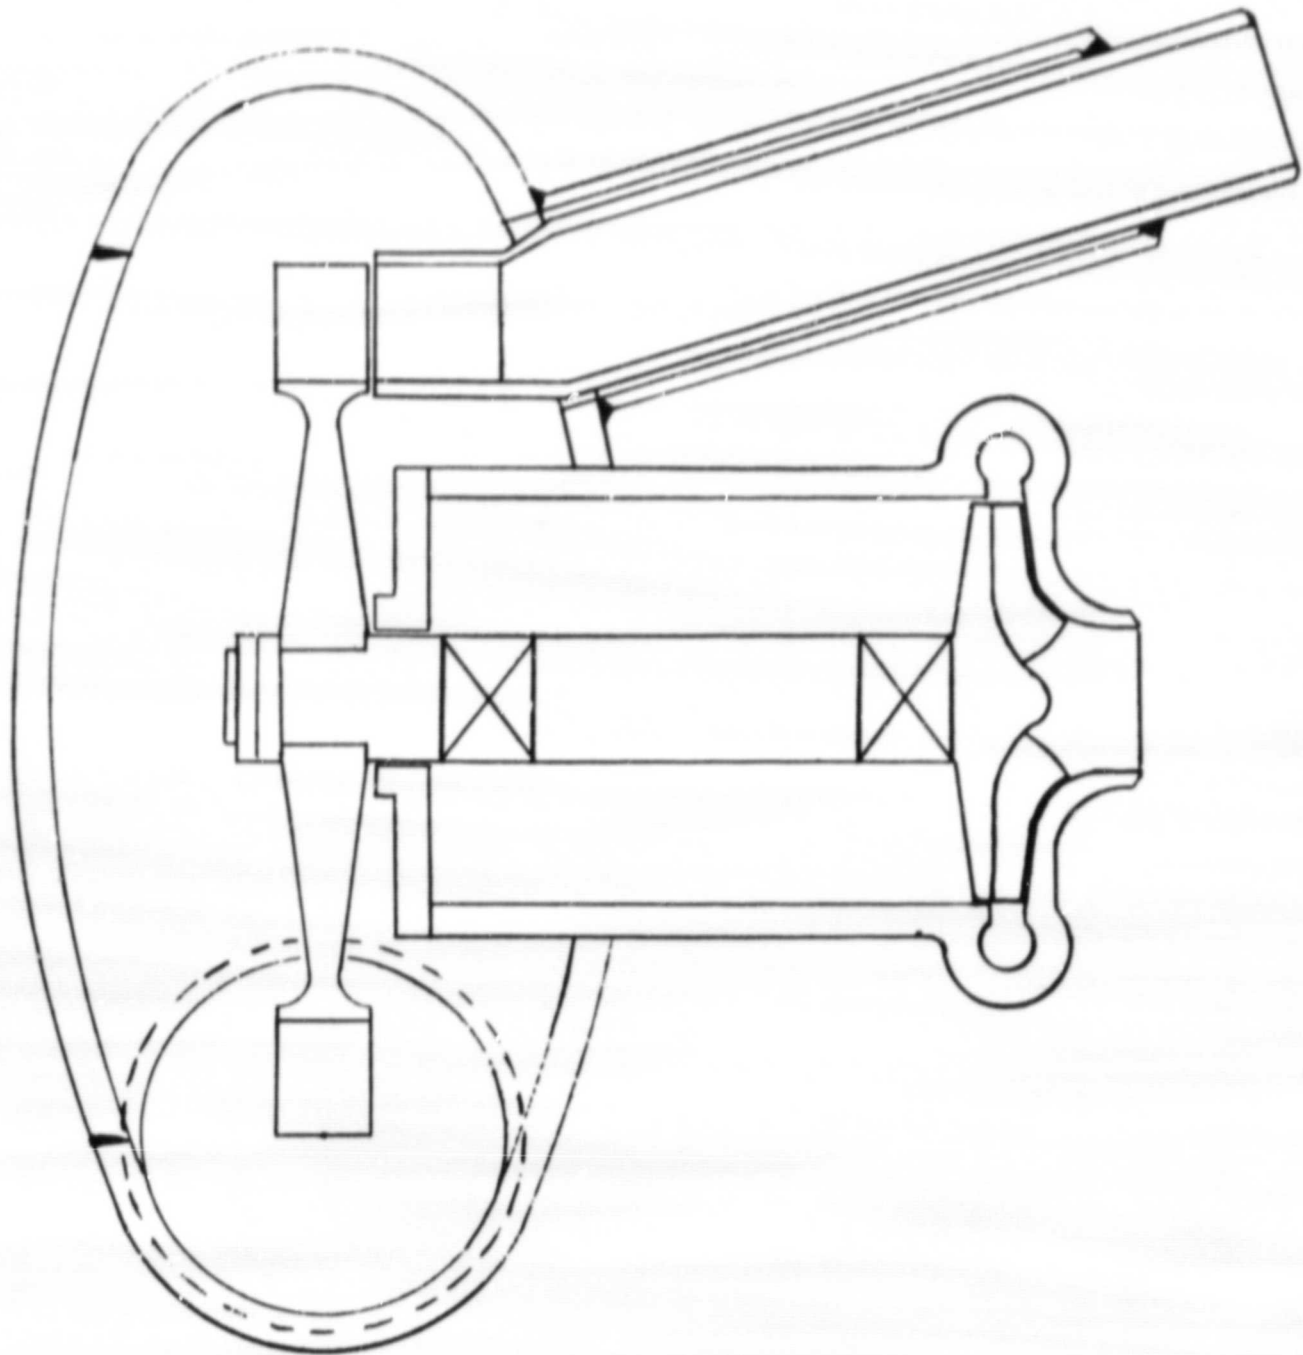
Cross Section of the Preliminary Design of the Free Turbine-Driven Pump for Cesium Boiler Feed Application. Shaft speed, rpm - 20,000; Turbine wheel diam, in. - 5.5; Impeller diam, in. - 2.6; Turbine-pump weight, lb - 35.
